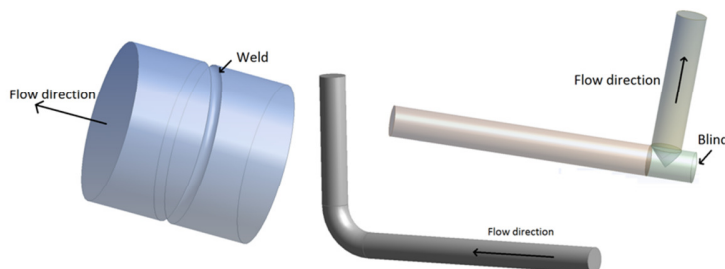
Geometries under investigation; the welded joint, the pipe bend and the blinded tee.
